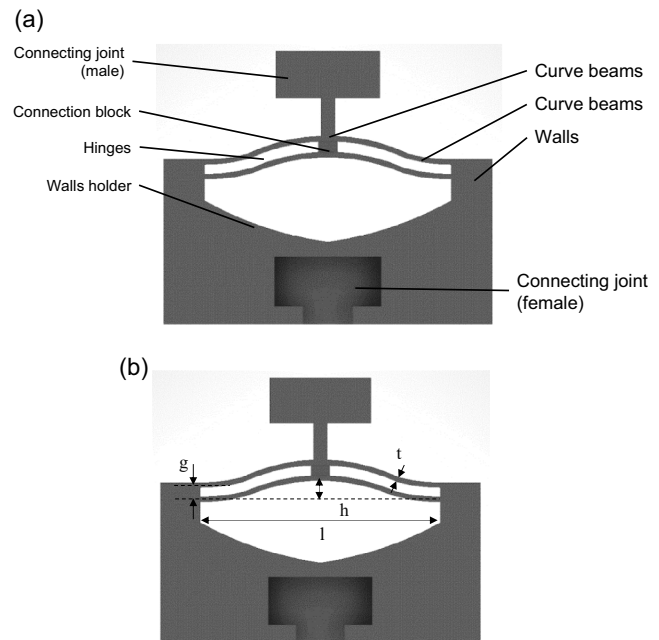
Schematic of the bistable component: a) 2D CAD drawing with annotations and b) 2D CAD drawing with dimensions.
